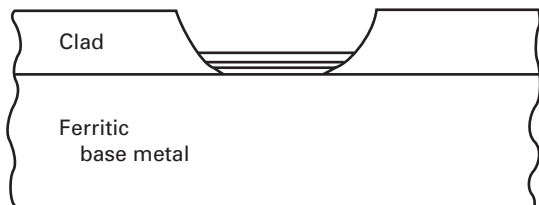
AUTOMATIC OR MACHINE (GTAW) TEMPER BEAD WELDING OF CLADDING
